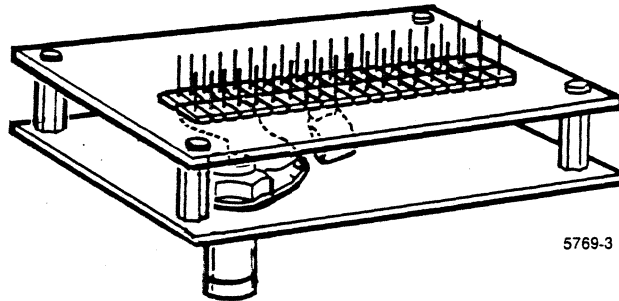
Threshold test fixture for 91HS8/91HSE8.
